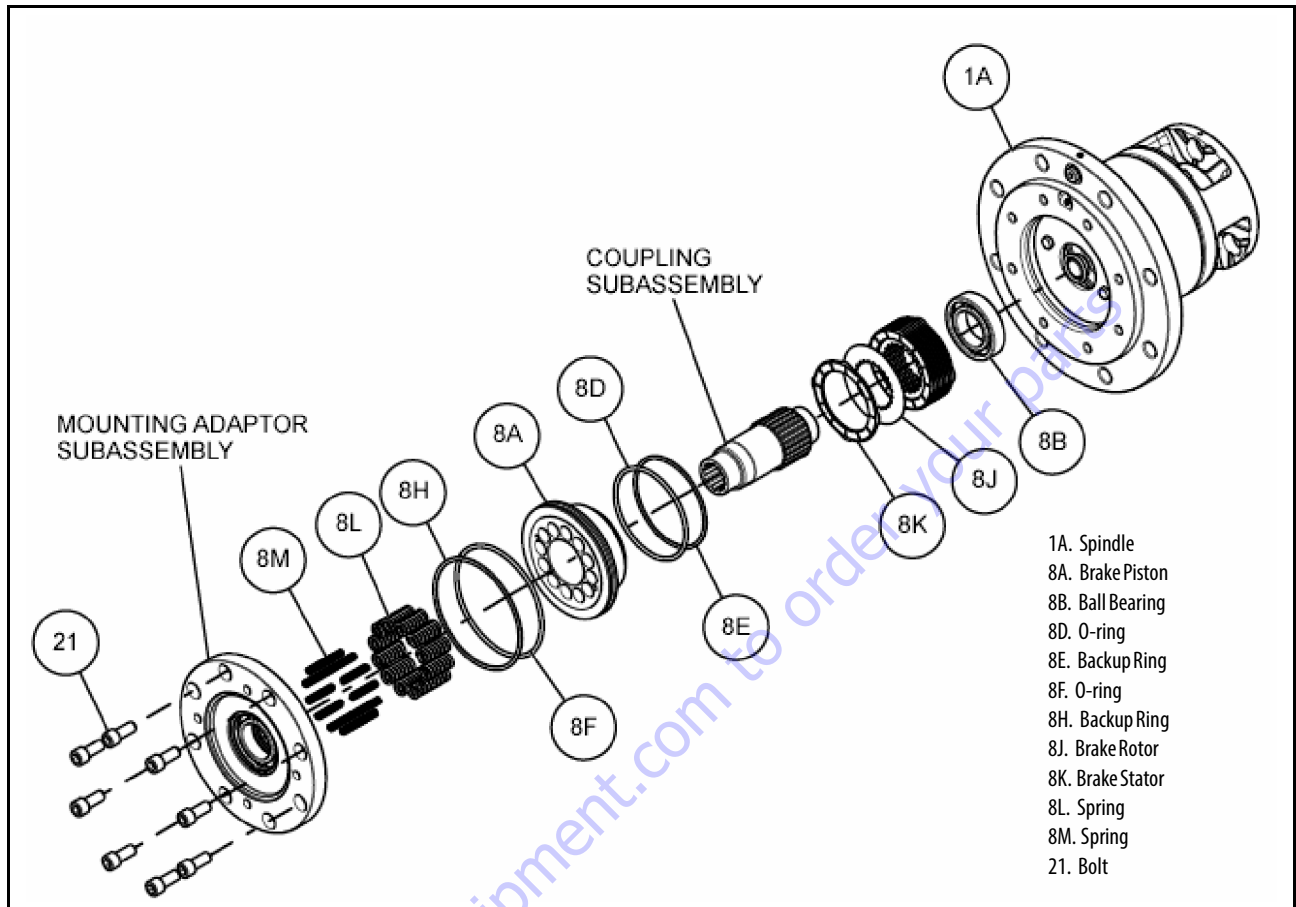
Spindle-Brake Subassembly - Figure 1
